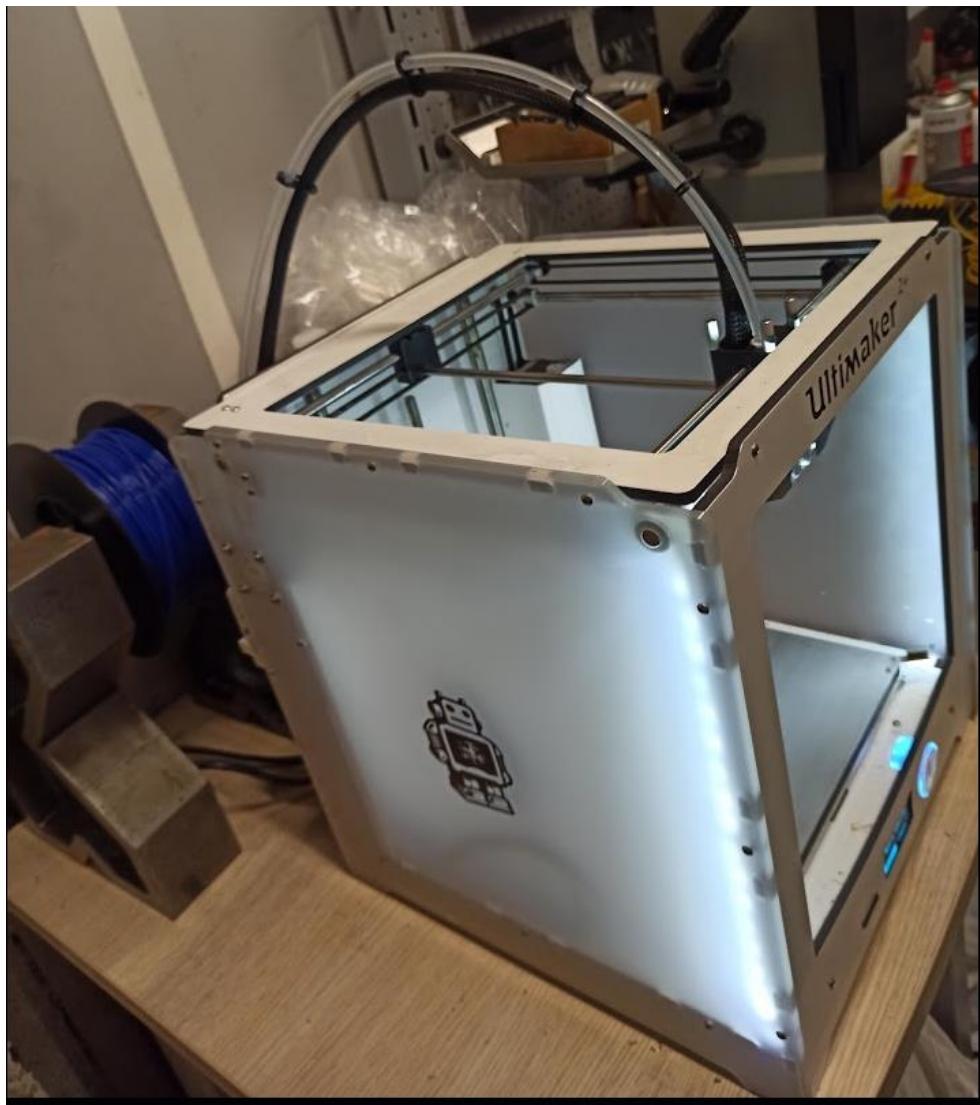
3D printer Ultimaker 2+ in side view with material feed visible.
